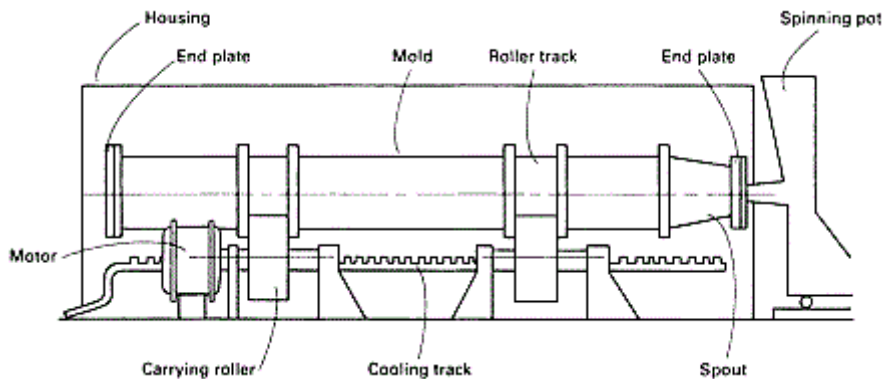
A schematic illustration of a horizontal centrifugal casting machine [3]
